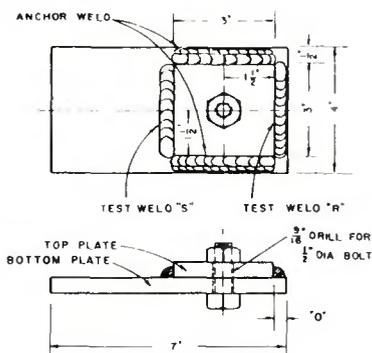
Controlled thermal severity (CTS) weldability test specimen used by Reeve (Ref. 3) and Hasebe (Ref. 4)
